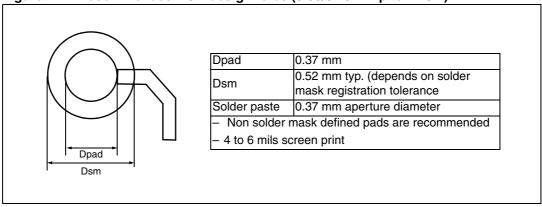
Recommended PCB design rules (0.80/0.75mm pitch BGA)
